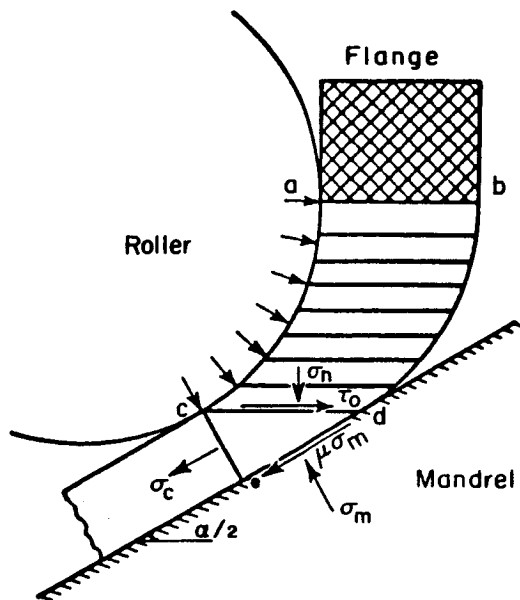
DEFORMATION ZONE IN SHEAR FORMING (REF. 78)
